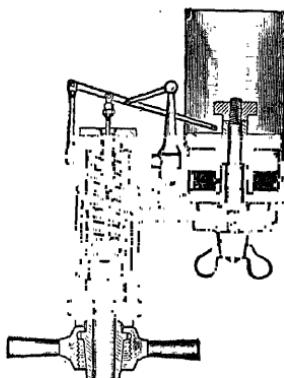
Thompson indicator. American Steam Gauge & Valve Mfg. Co., Boston.
